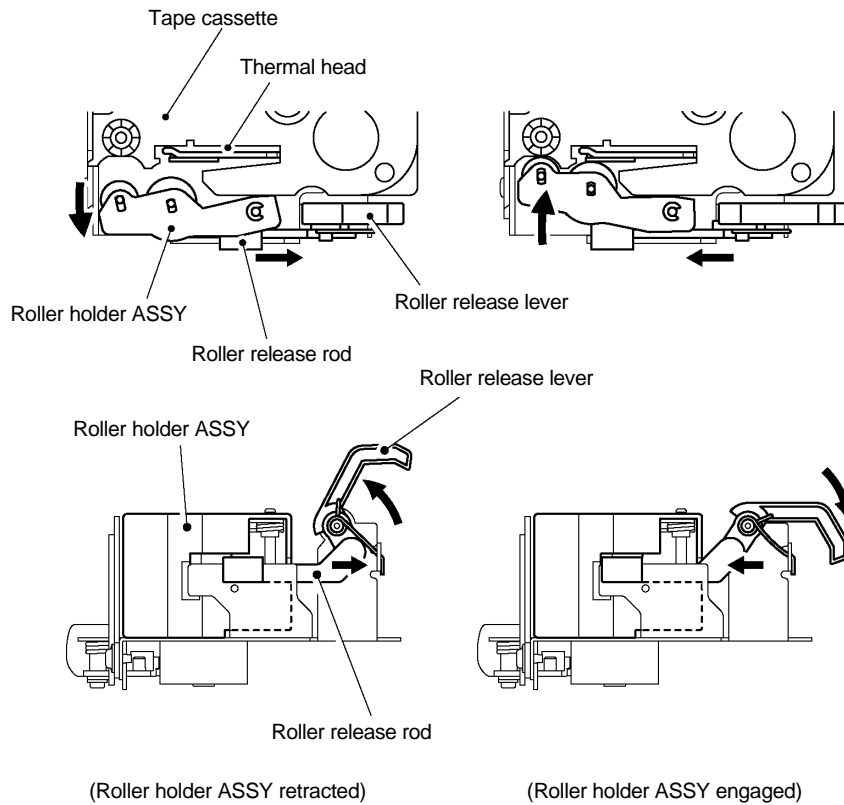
Roller Holder ASSY Setting & Retracting Mechanism
